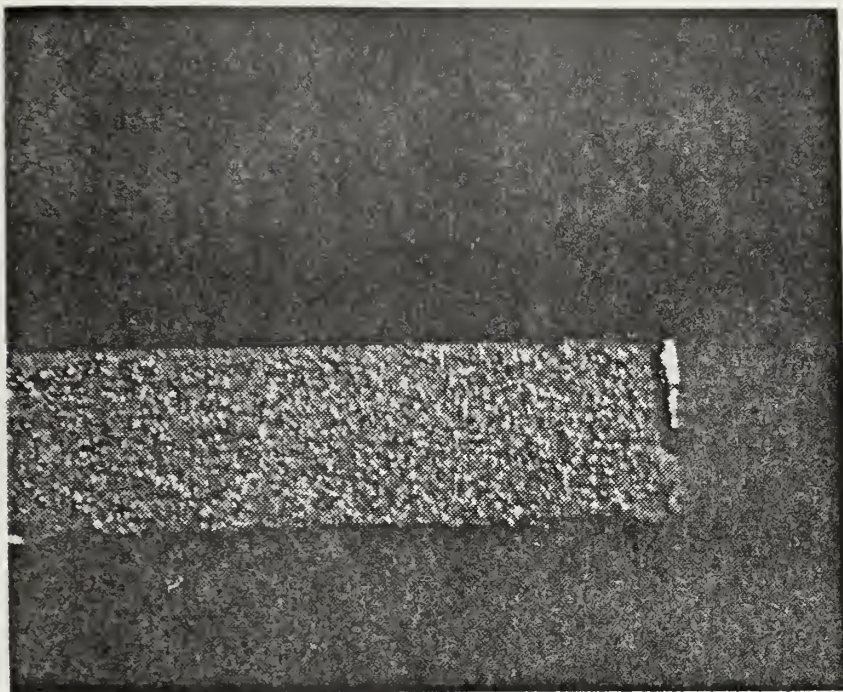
Macro-fractograph of specimen QI-0-5 which was fractured after 20,000 cycles at 100 ksi; the absence of a fatigue zone is evident as is a coarse fracture surface. X10.
